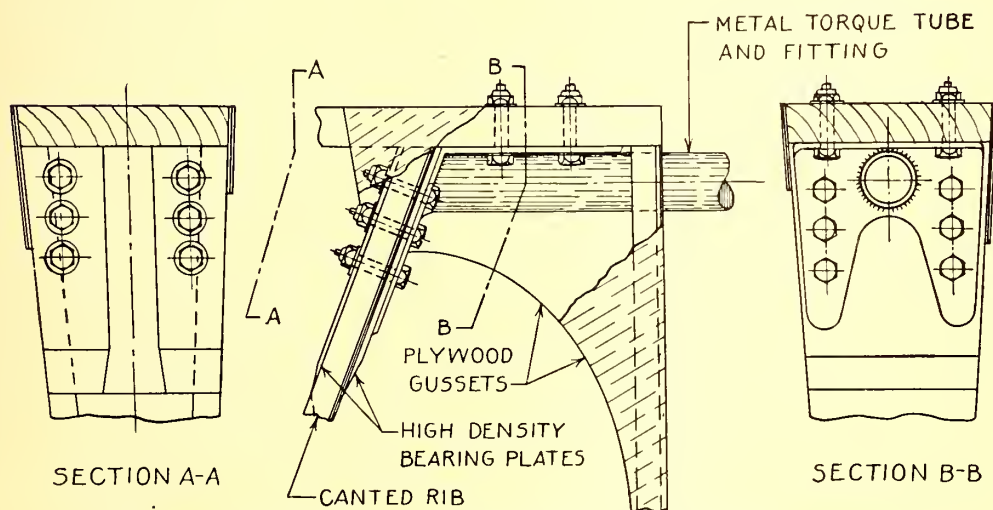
Example of Elevator Torque Tube Attachment to Control Surface.
